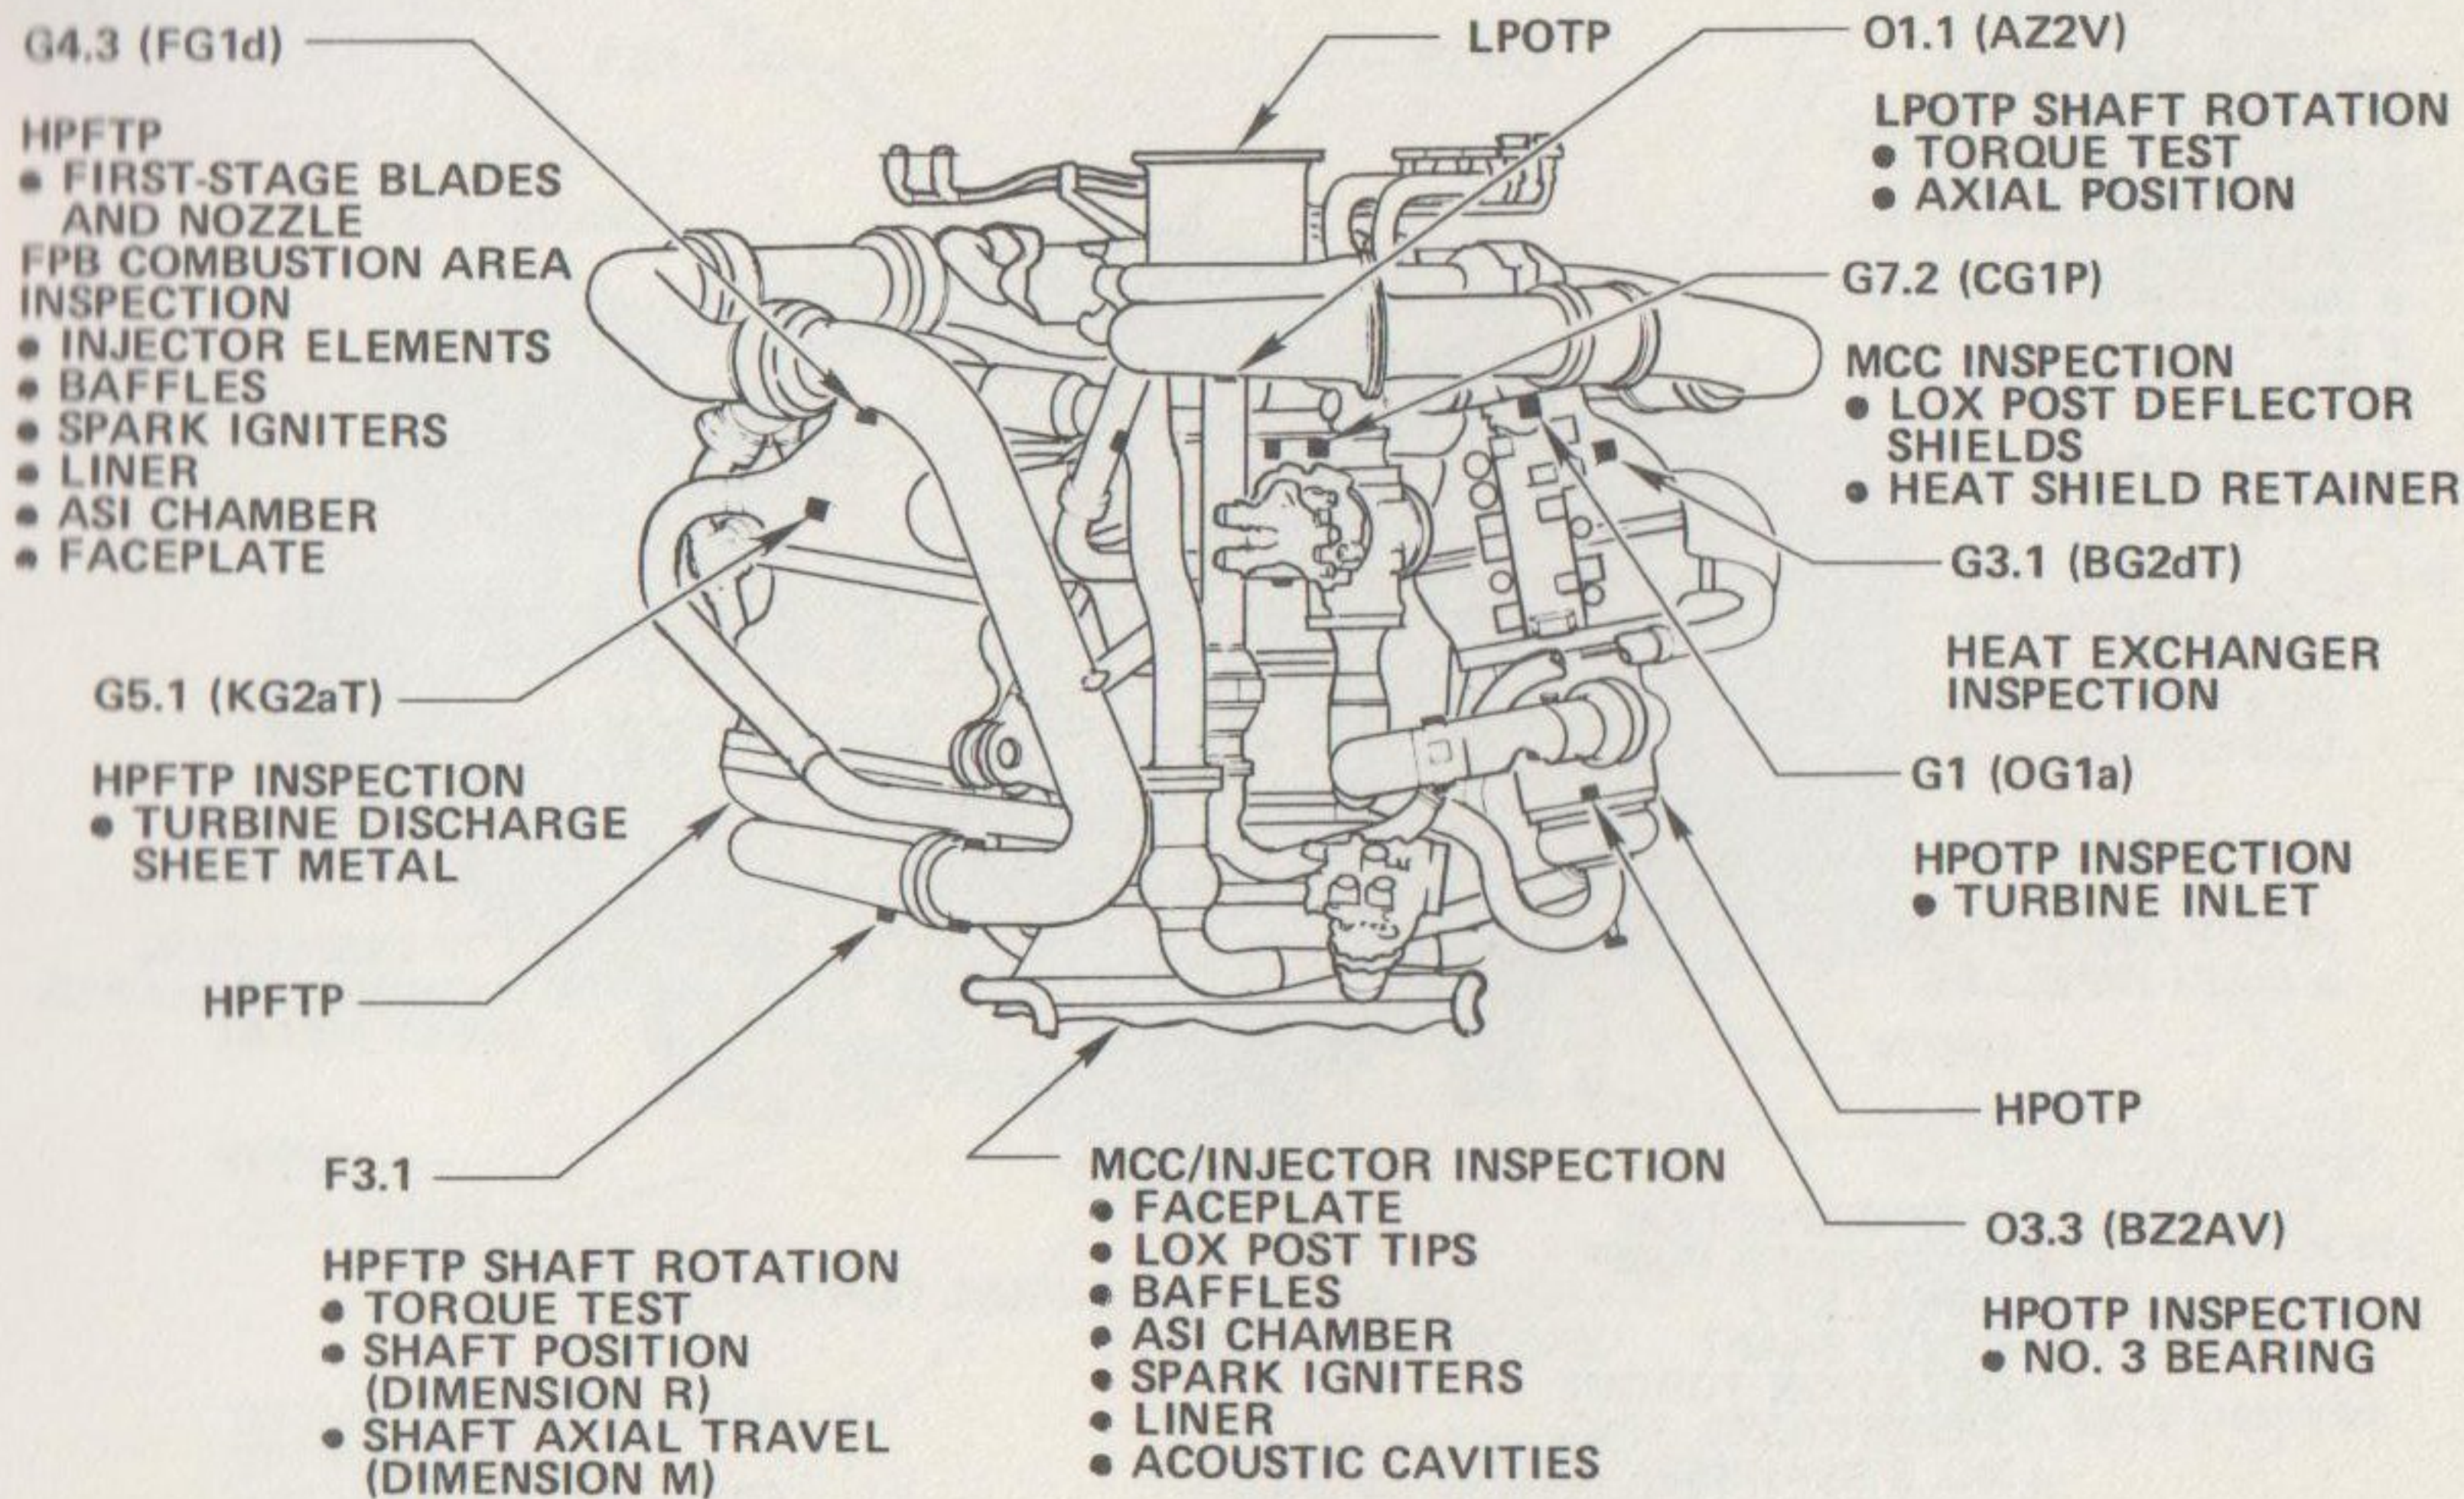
INTERNAL INSPECTION AND SHAFT ROTATION ACCESS - LPOTP SIDE OF ENGINE
